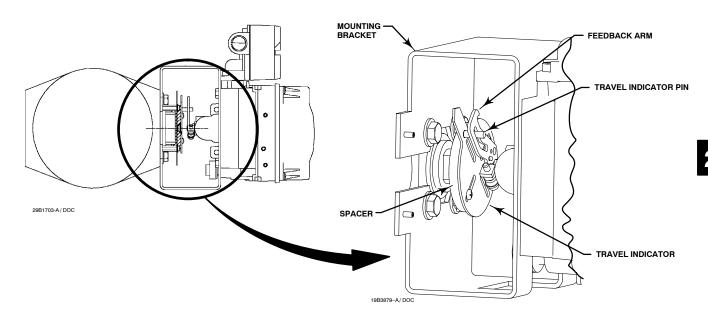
Mounting a Type DVC6030f Digital Valve Controller on a Rotary Actuator (Type 1032 Size 425A Shown)
